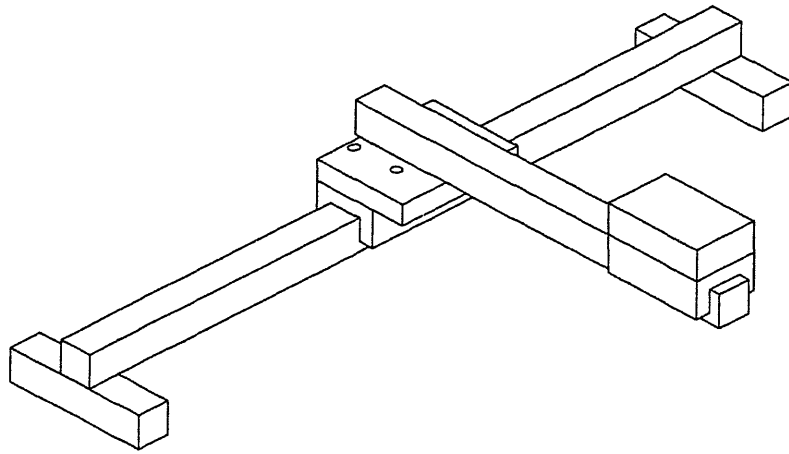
Pro/ENGINEER Model of Experimental Setup
